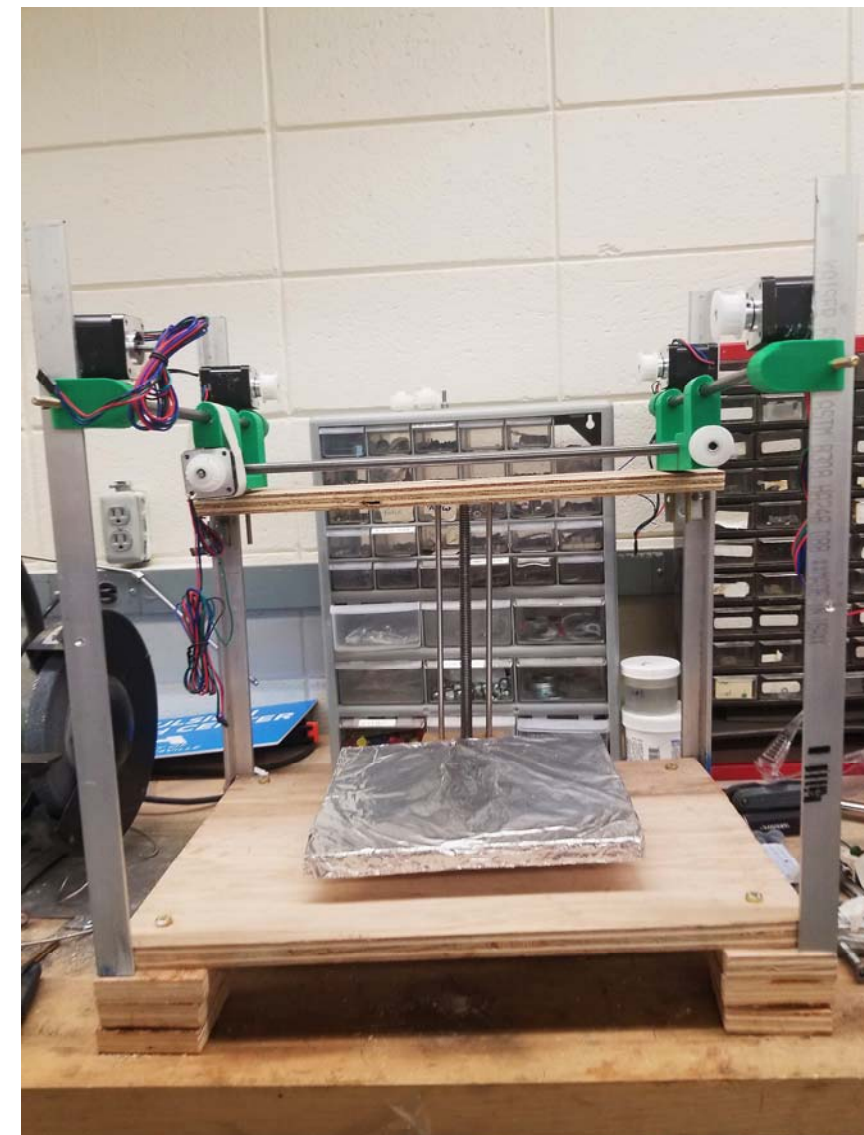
Nearly finished Prototype Ceramic 3D Printer
